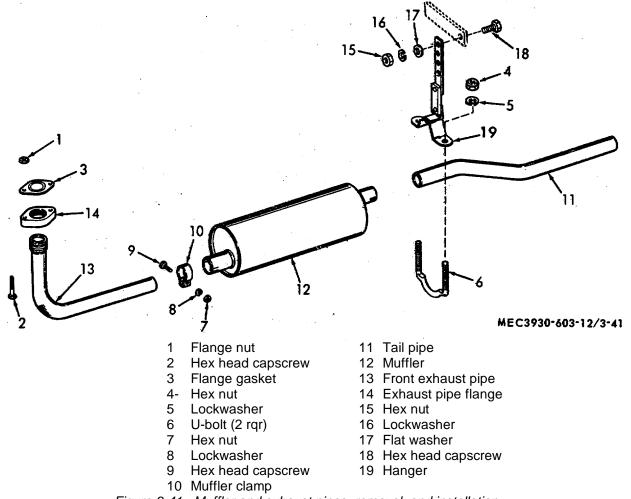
Muffler and exhaust pipes, removal, and installation
